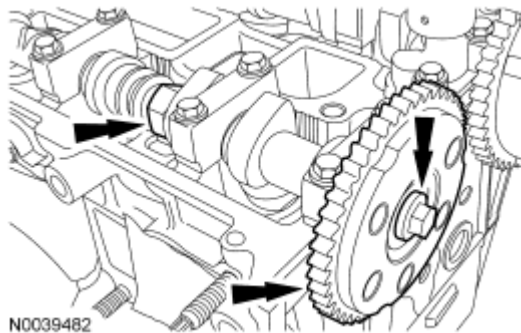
Locating Bolt And Exhaust Camshaft Sprocket
